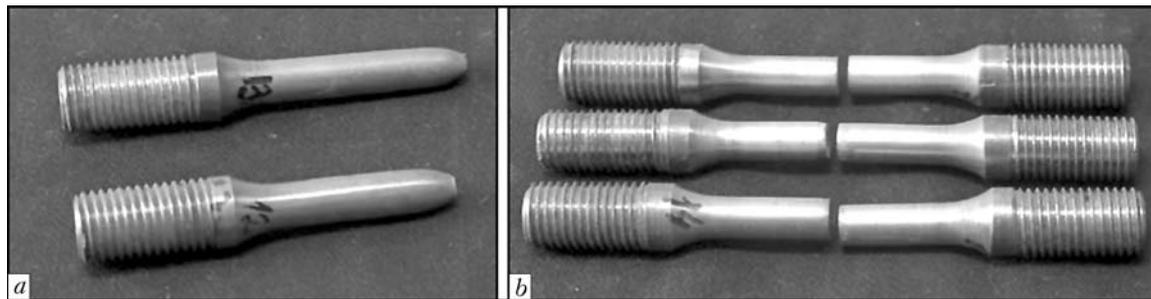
Appearance of specimens after mechanical tests: *a* – base metal; *b* – brazed joints
